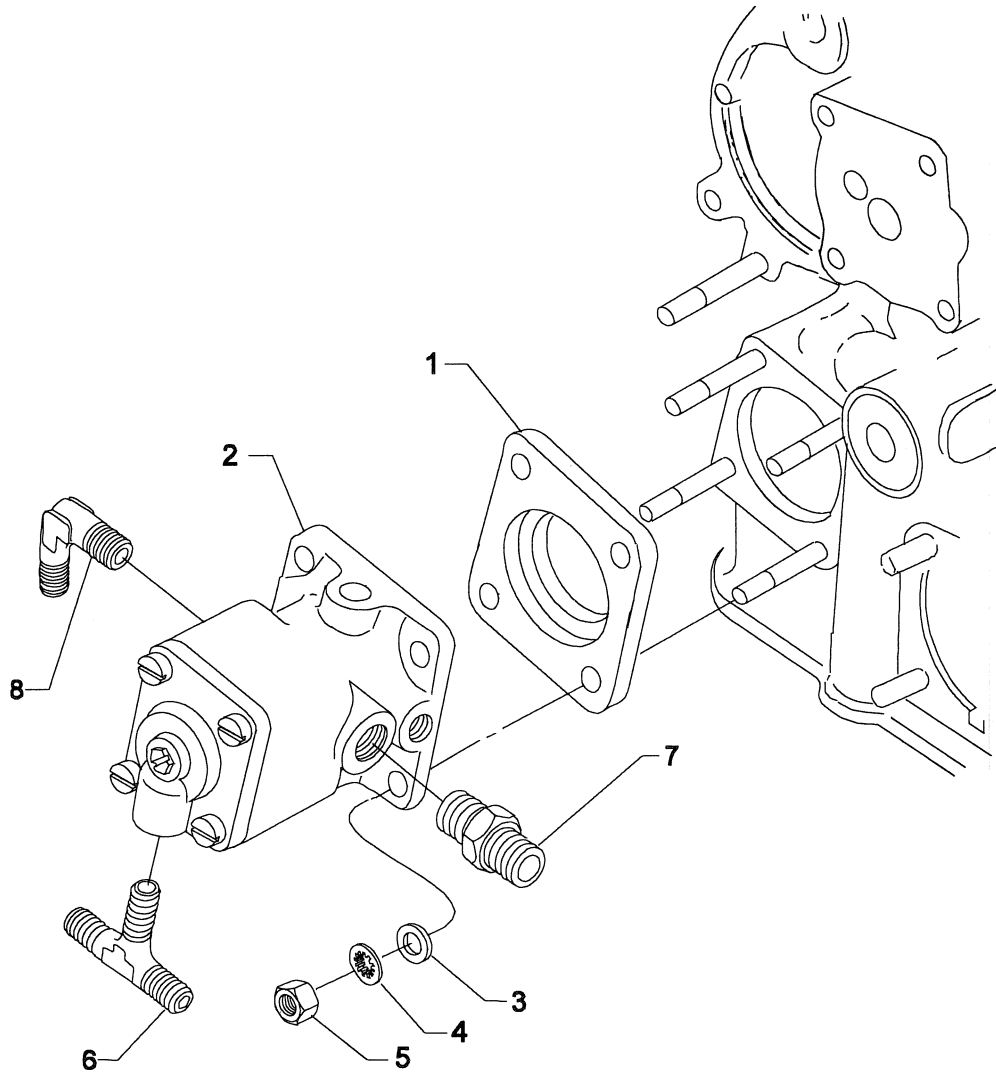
FUEL PUMP ASSEMBLY AND ATTACHING PARTS
